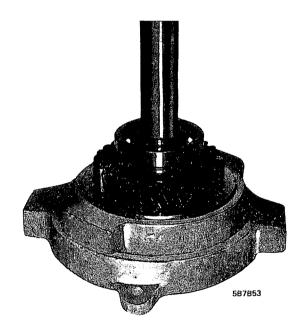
B-53 - Removing Rear Bearing and 1st Speed Gear
